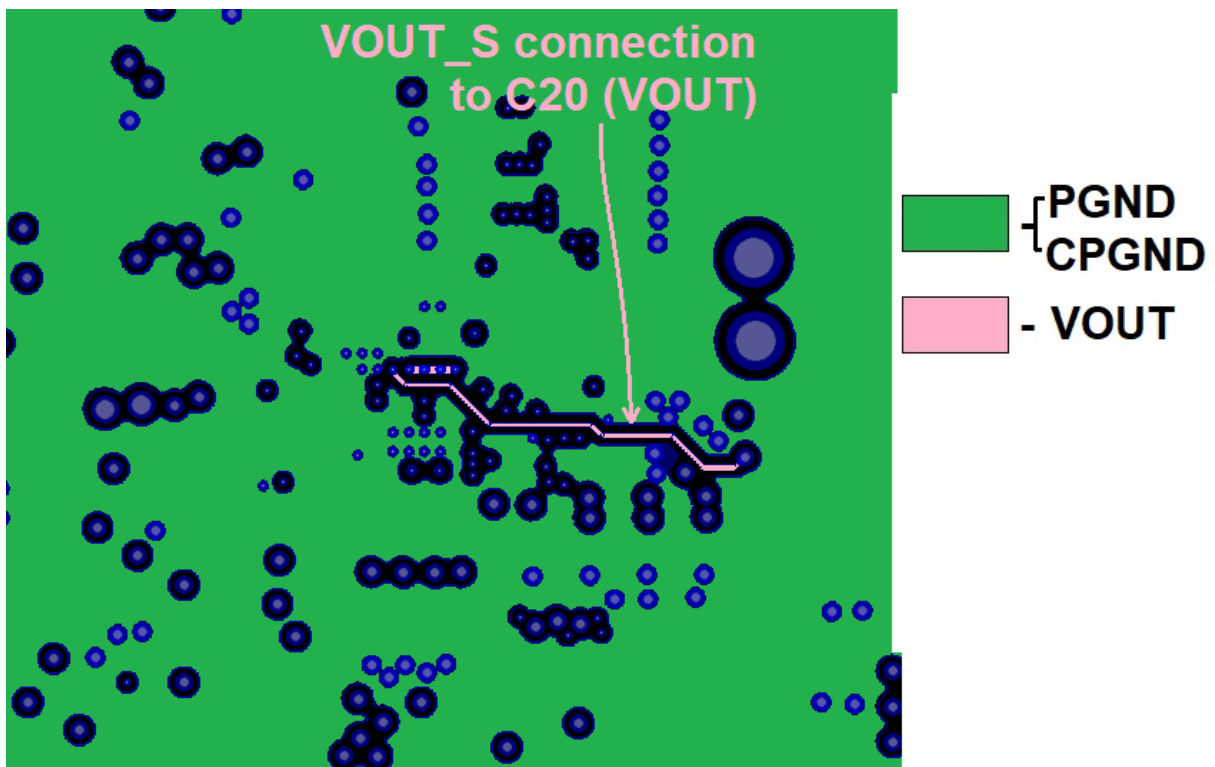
P9412 Layout from Demo PCB Sixth Layer (Bottom)
